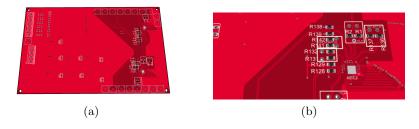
(a) 3D sketch of the PCB test board and (b) zoom of the top layer of the PCB.
